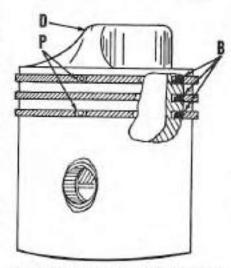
Cross sectional view of piston showing two of the three piston ring locating pins (P). The other pin is in opposite side of piston. Rings are installed with beveled inner edge (B) toward closed and of piston. Deflector (D) directs the flow of incoming fuel charge for proper scavenging.
